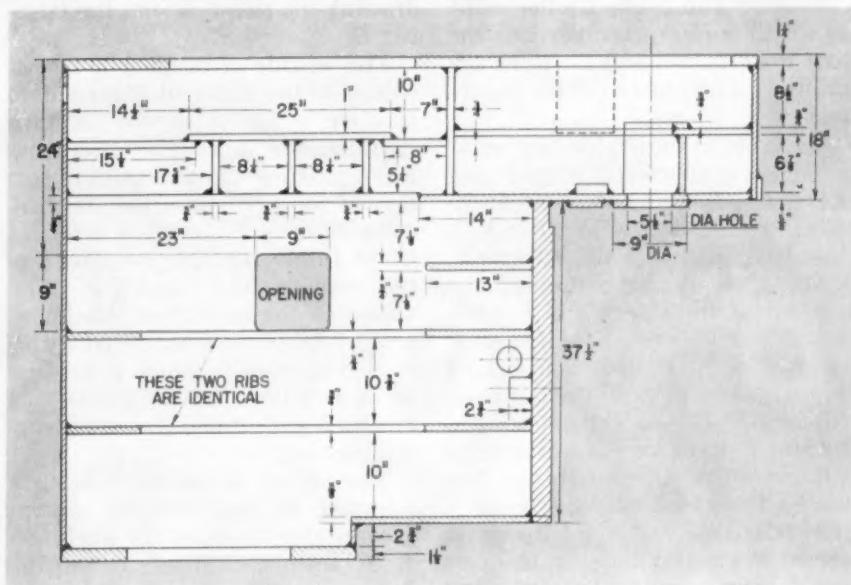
Cross-section through center of column which is bolted to the base through the lower plate member. Vertical slide on
